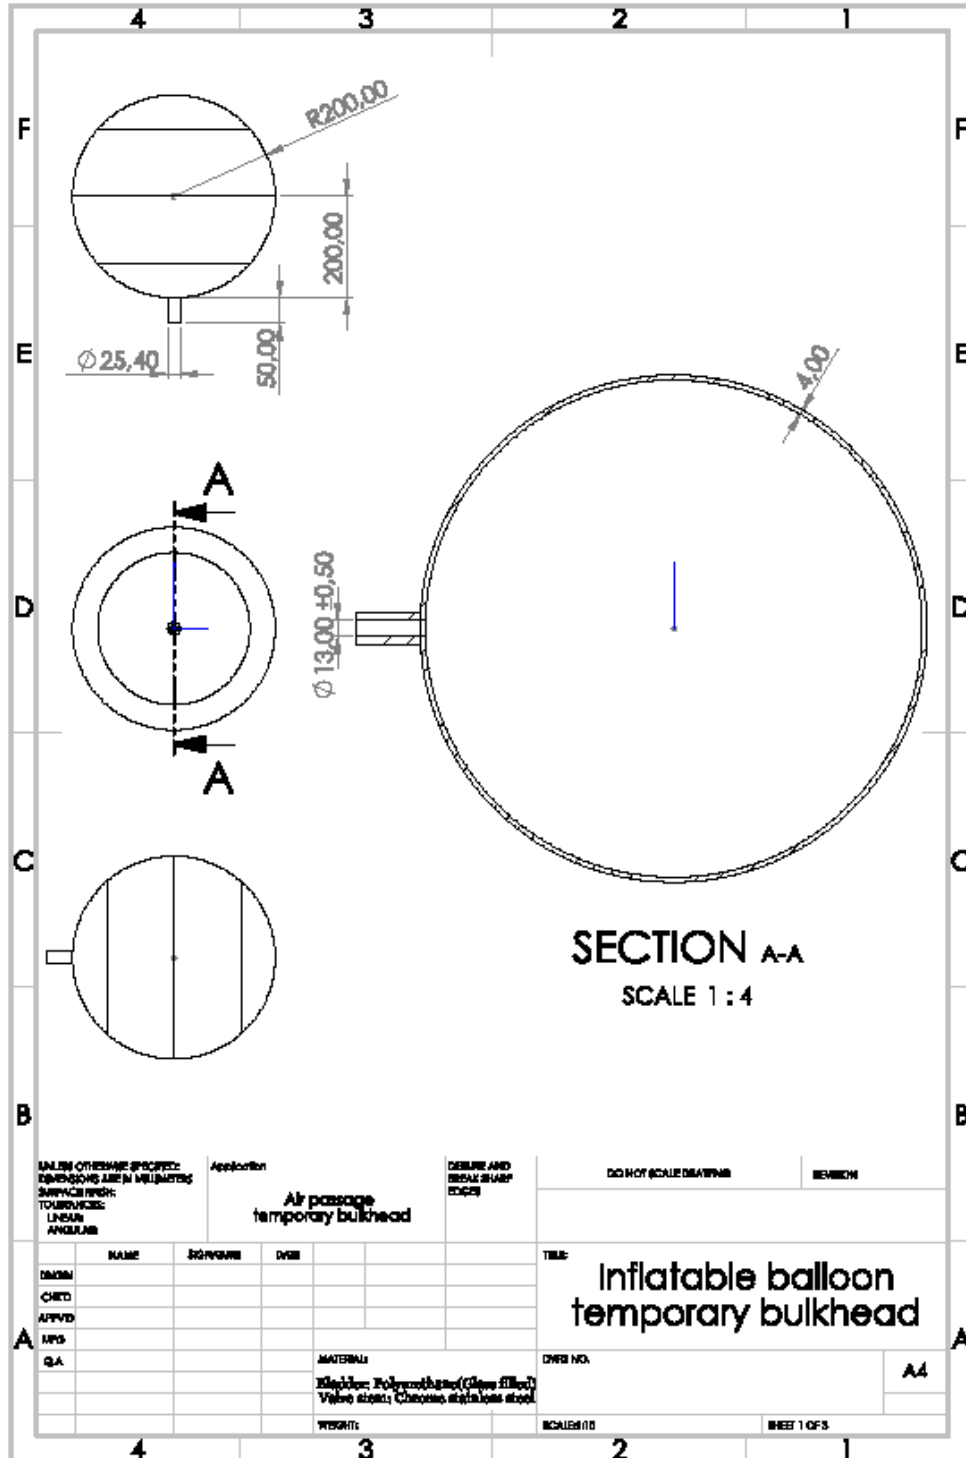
2D technical drawing of the air passage balloon temporary bulkhead
